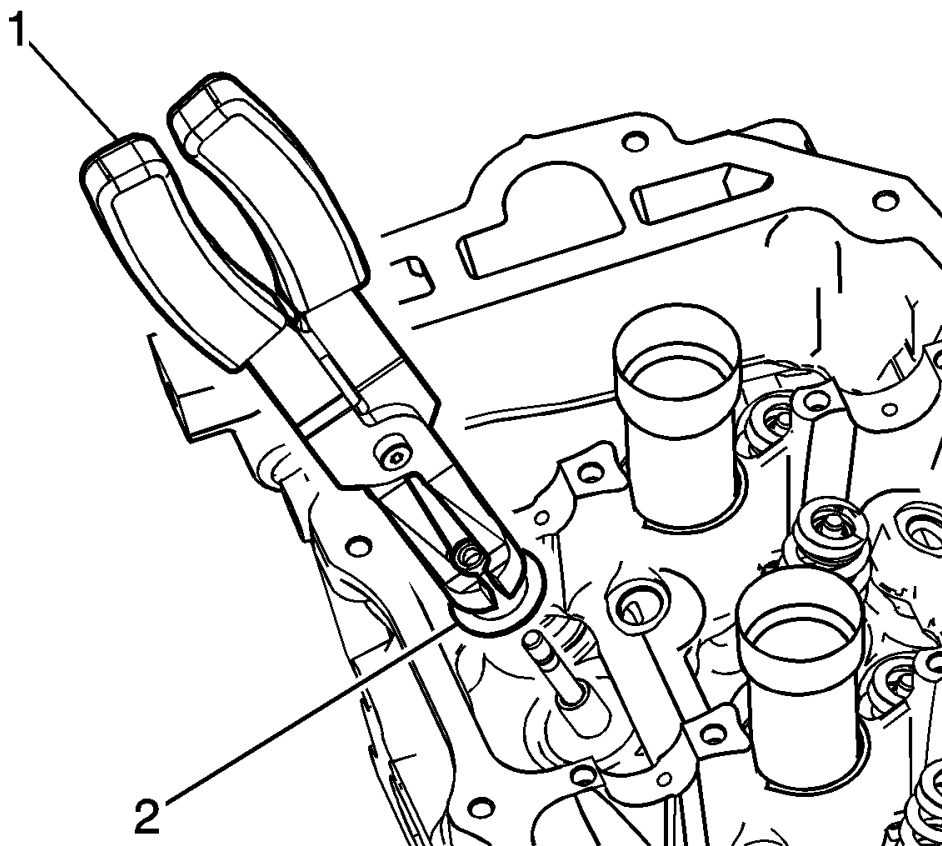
Identifying Special Tool - EN-46116 & Valve Stem Seal
